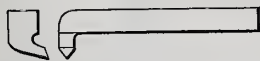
Tool for Boring the Mandrel Bearing in the Brasses.
